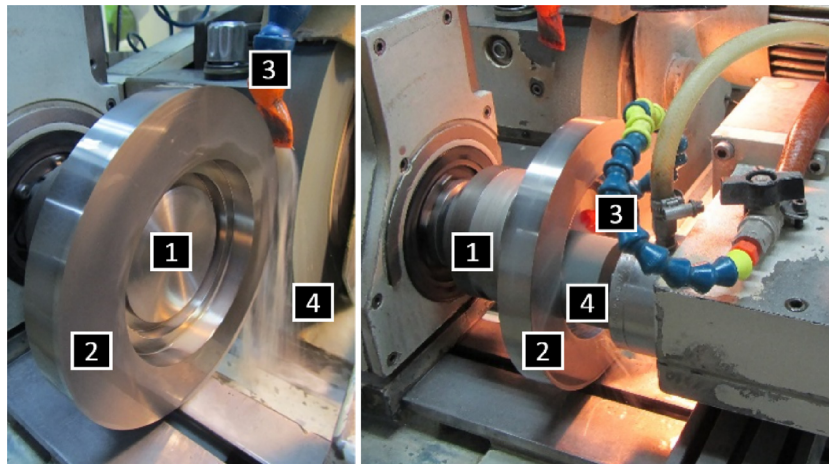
Grinding of the titanium rotor version 1. The chuck (1), the rotor (2) and the grinding wheel (3) are shown, along with the coolant (4) which was applied externally or internally.
